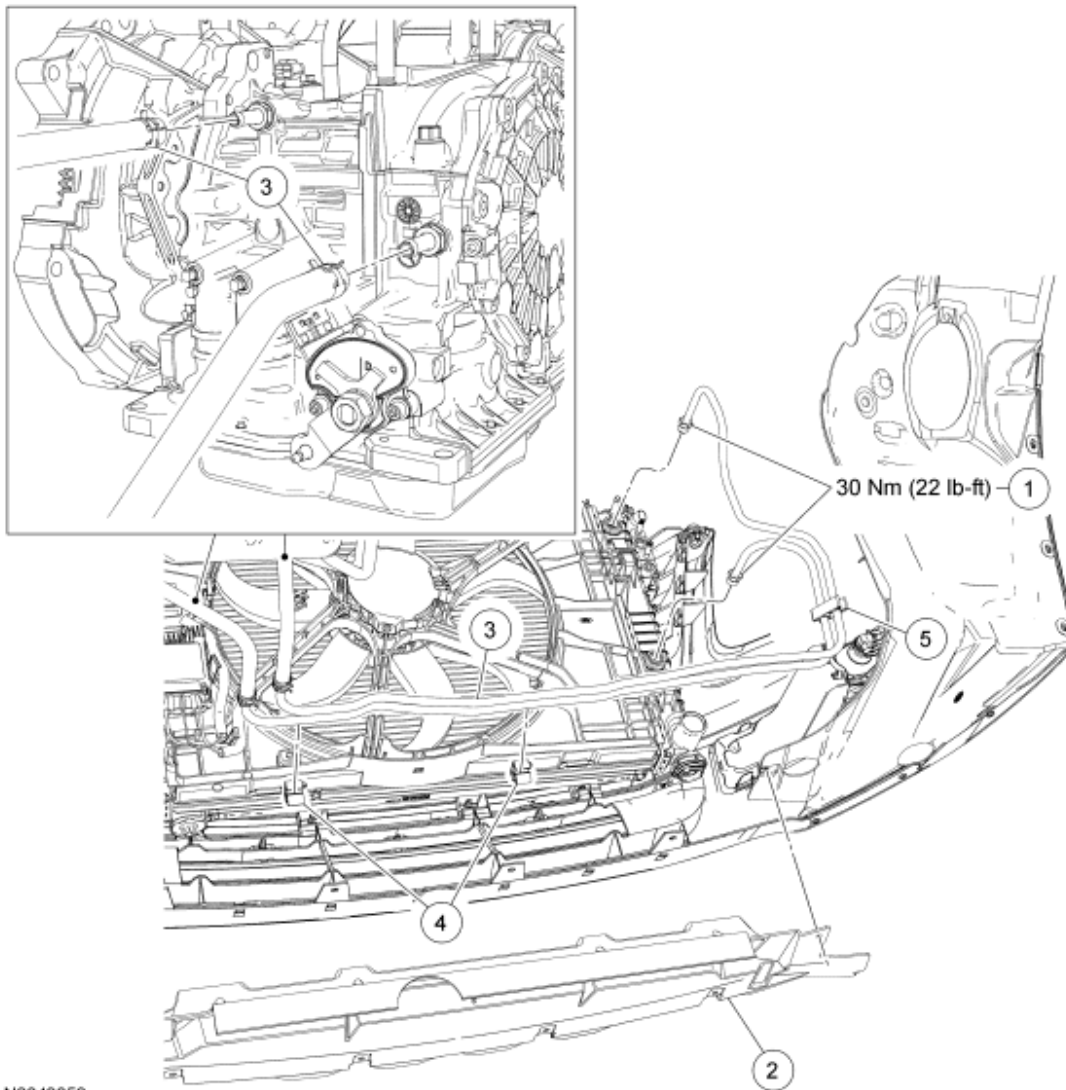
Exploded View Of Transmission Cooler Tubes With Torque Specification - FNR5
